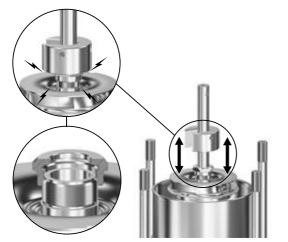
Loosening the impeller (49 or 49a) with service tool C
